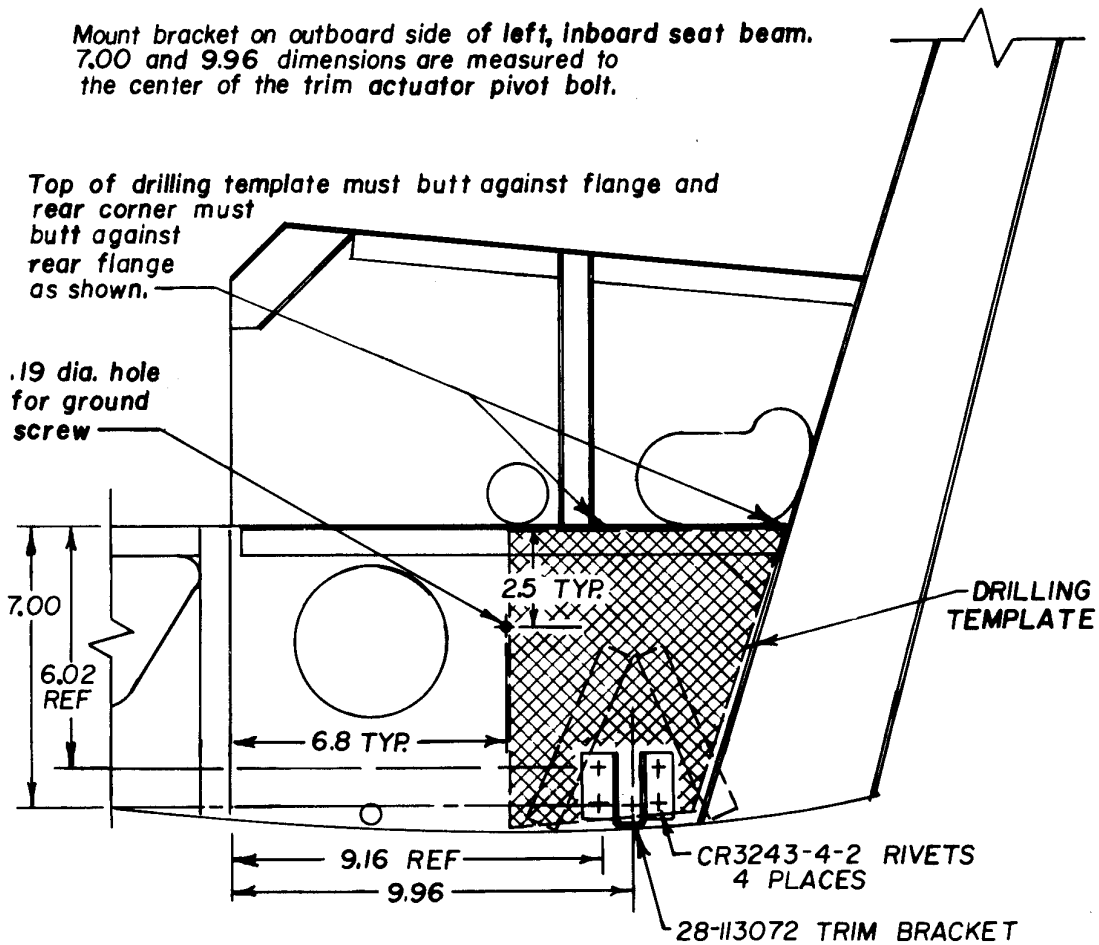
Trim Actuator Bracket Location on Left Inboard Seat Beam
